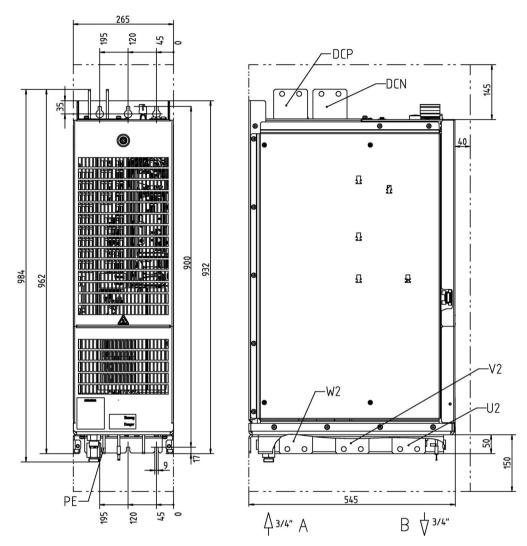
Dimension drawing Motor Module, frame size HXL. Front view, side view
